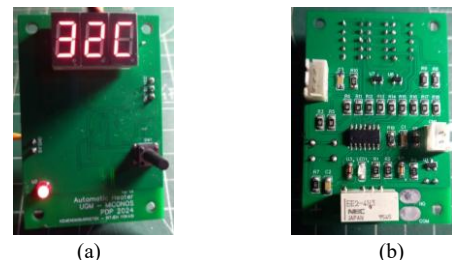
Implementation and testing: (a) Top view, (b) Bottom view
